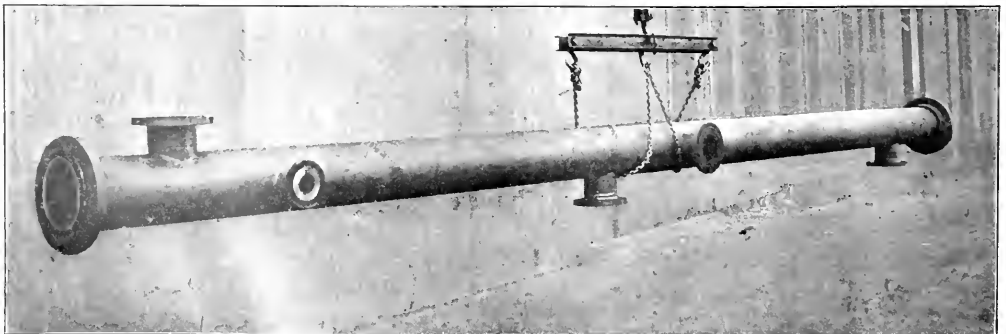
LARGE STEAM HEADER, 31 FT. LONG; ROLLED STEEL FLANGES AND SEAMLESS NOZZLES
